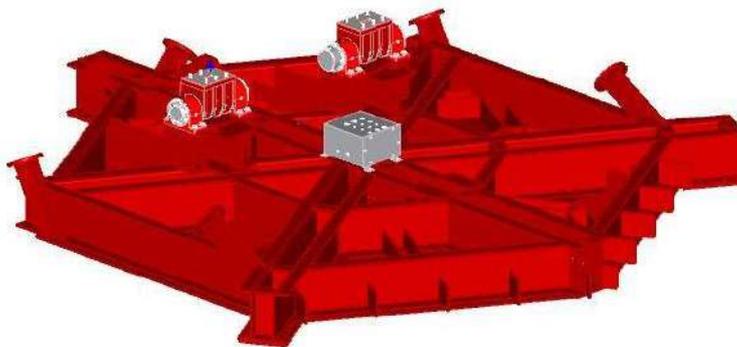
EL bearings and EL cable wrap box installation on M1 dish
